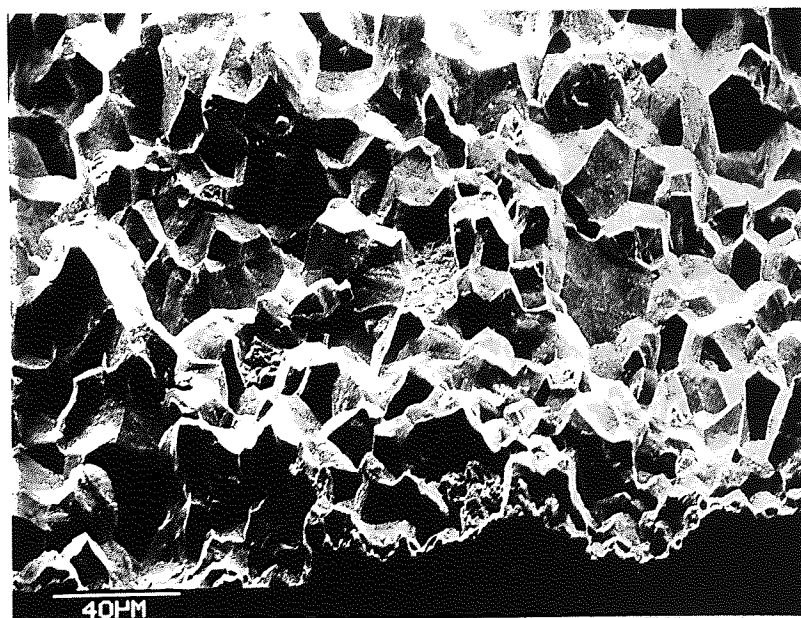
a. Crack initiation zone in 635A14, carburised by single stage (G3), and tested in rotating bending.
